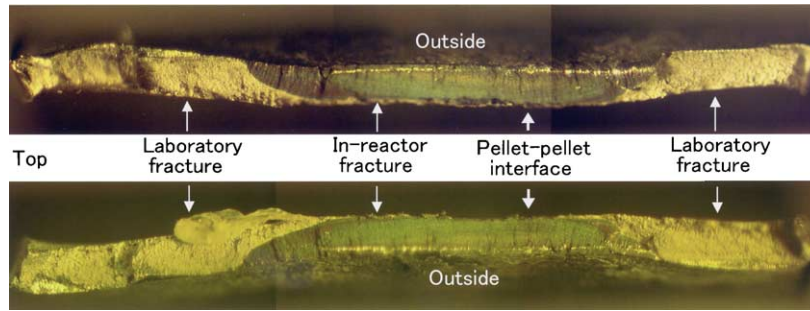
Fracture surface pair of P2(D4/F3-5) cladding tube.
